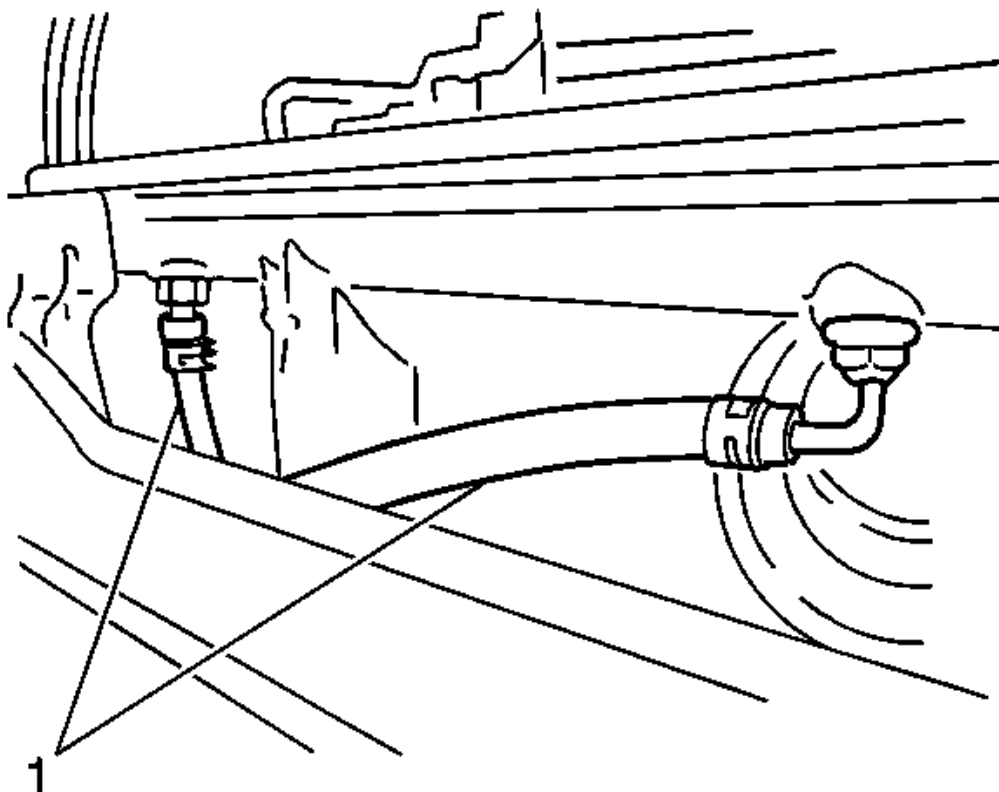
View Of Automatic Transmission Fluid Cooler Lines
